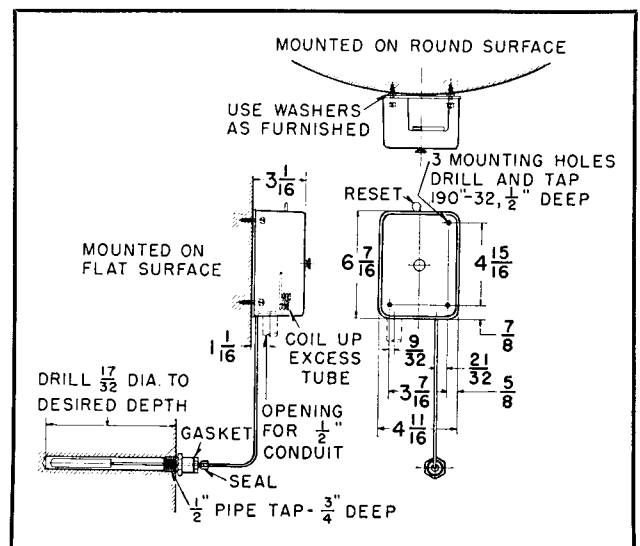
Details for Mounting Type HQ Relay on Transformer Tank (Approximate Dimensions are Shown for Reference Only)
